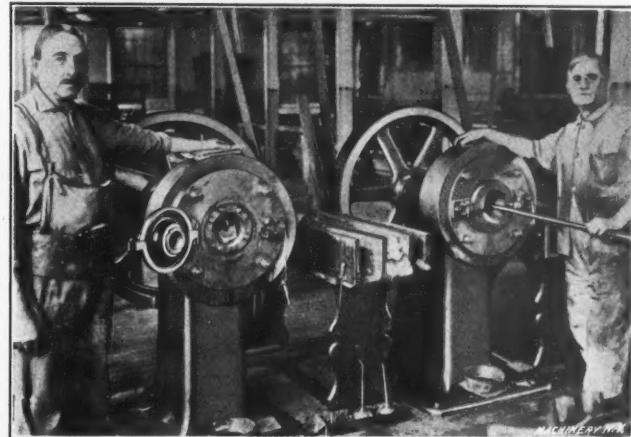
Starting Solid Gold Wire in the Large Swaging Machines
